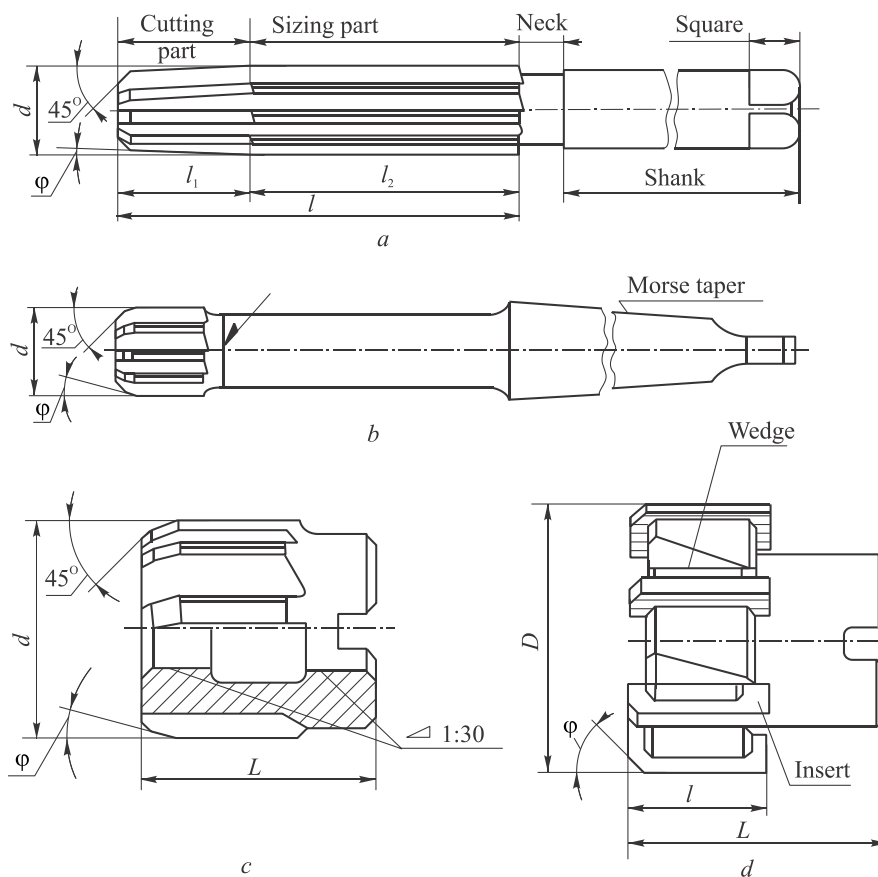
Reamers: (a) hand-type; (b) machine-type; (c) shell-type; (d) inserted
